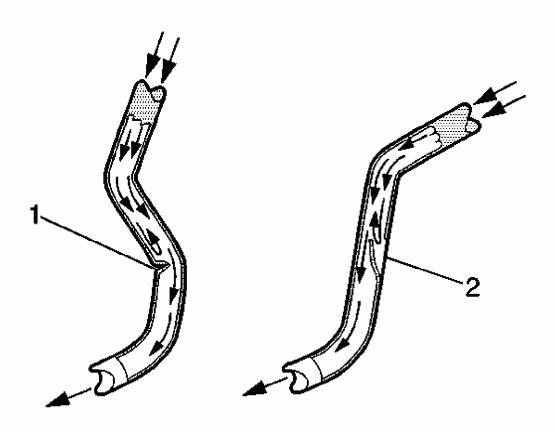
Identifying Flexible Brake Hose Failure Conditions Courtesy of GENERAL MOTORS CORP.
